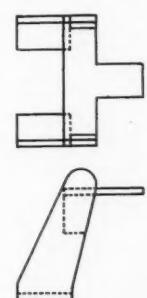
Workpiece produced by the assembly of three quite simple parts.
